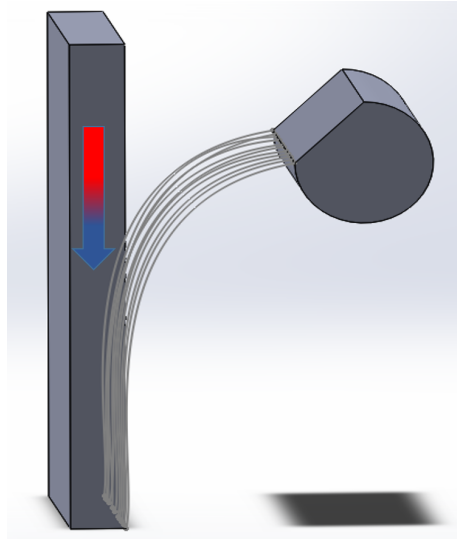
Moving mold mechanism in moving sheet experimental setup
